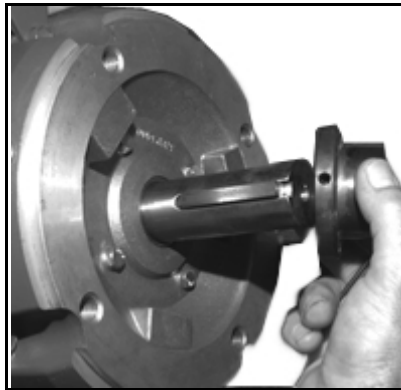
Aligning taper bushing with motor drive shaft (10 HP motor installation shown)
